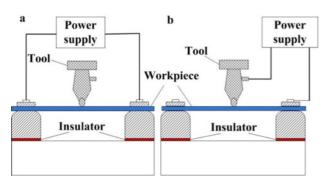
A schematic of EA stretch forming processes; (a) Across the workpiece (b) Through the tool to the workpiece (modified and redrawn from Ref. 86)
